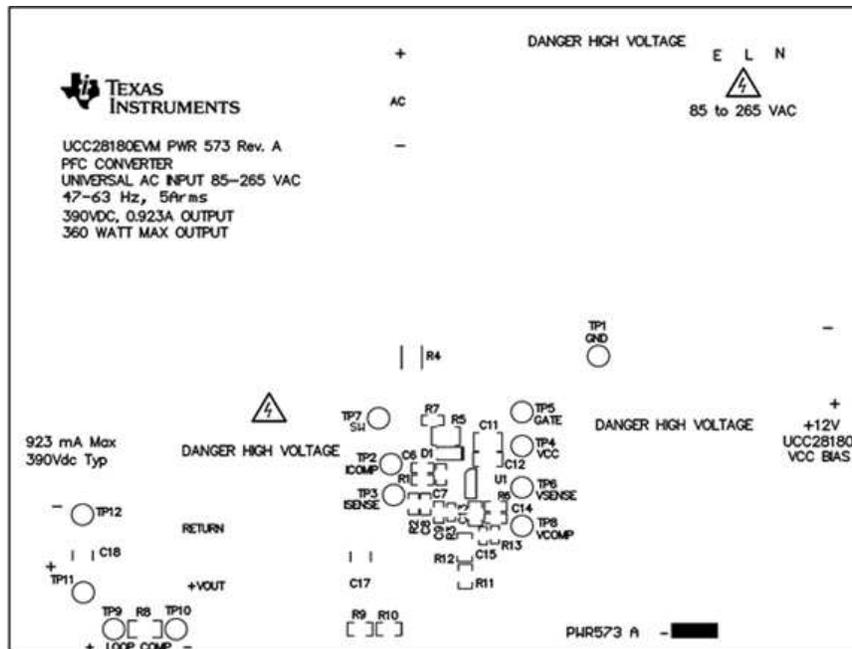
UCC28180EVM-573 Bottom Layer Assembly Drawing (bottom view)
